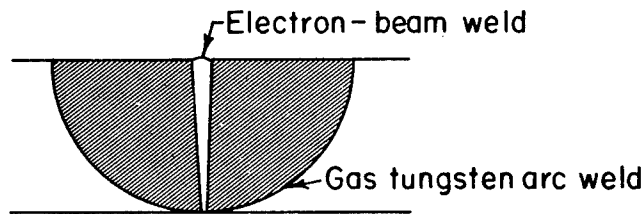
COMPARISON OF SIZE AND SHAPE OF ELECTRON-BEAM WELD AND GAS-TUNGSTEN-ARC WELD IN THE SAME MATERIAL
